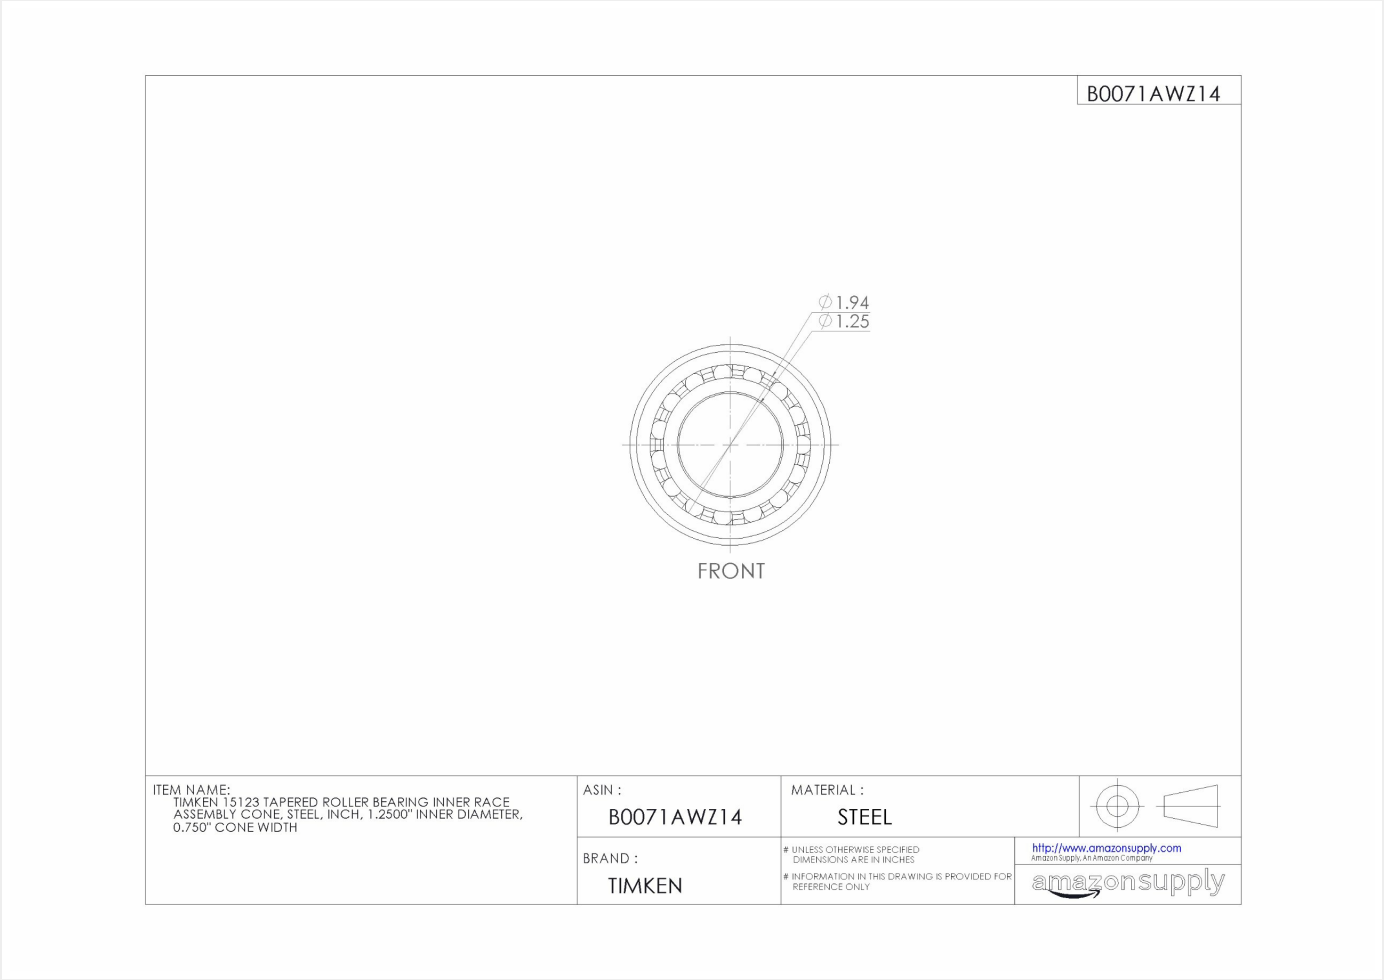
Front view technical drawing of the Timken 15123 bearing. This diagram provides key dimensions for the inner diameter and overall width from a frontal perspective, crucial for precise installation.
